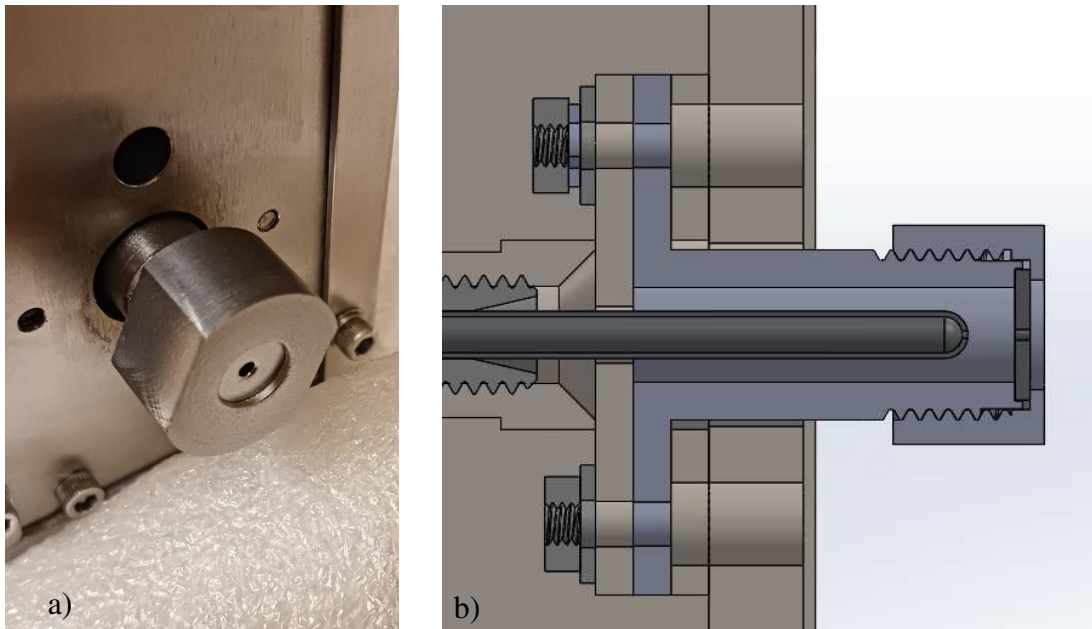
a) Photograph of the HA assembly. b) Section view of HA CAD
